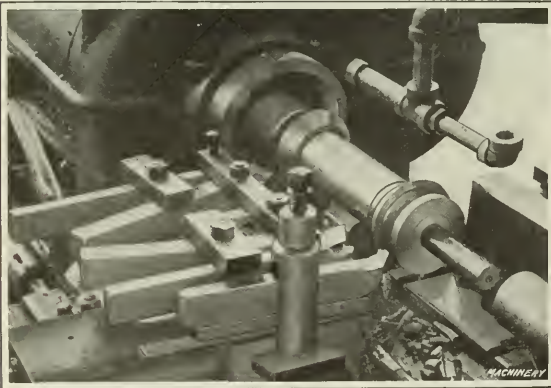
Tooling for Second Lathe Operations on Double Bevel Pinion
